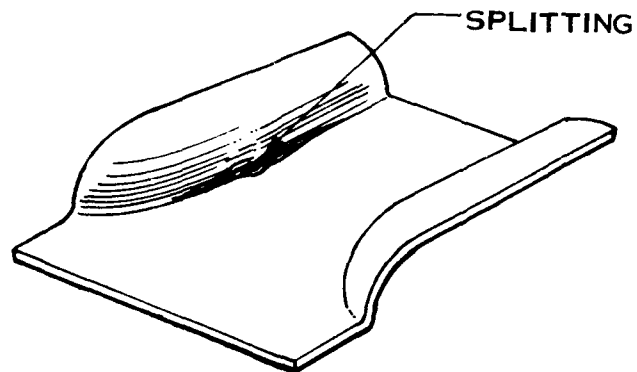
SPLITTING FAILURES IN DROP HAMMER BEADING
